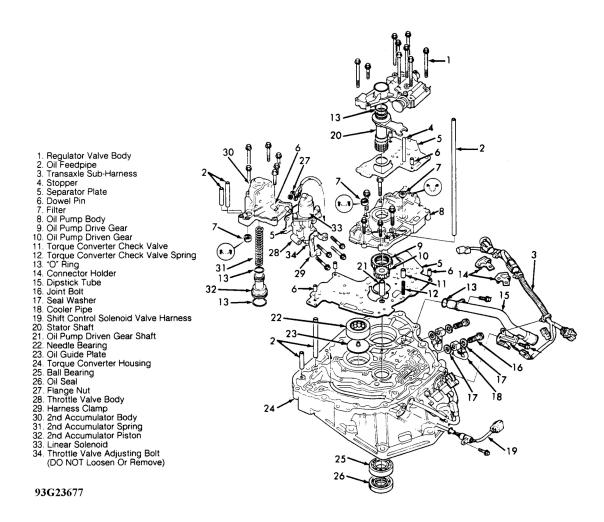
Exploded View Of Torque Converter Housing Courtesy of AMERICAN HONDA MOTOR CO., INC.
